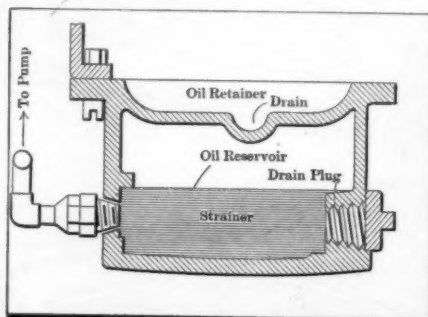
Oil pan of the Hudson Motor, also showing the false bottom into which the connecting rods dip
